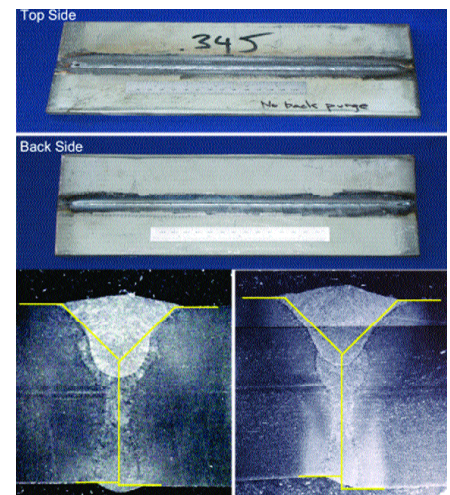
Hybrid welds used for mechanical and radiographic testing. Parameters are 0.5-in. (12.7-mm)-thick plate, 0.345 in. (8.8 mm) land, 90 deg included angle, 16 mm (0.63 in.) spacing, 10 in./min (0.25 m/min) travel speed, 200 in./min (5.1 m/min) wire feed speed.
